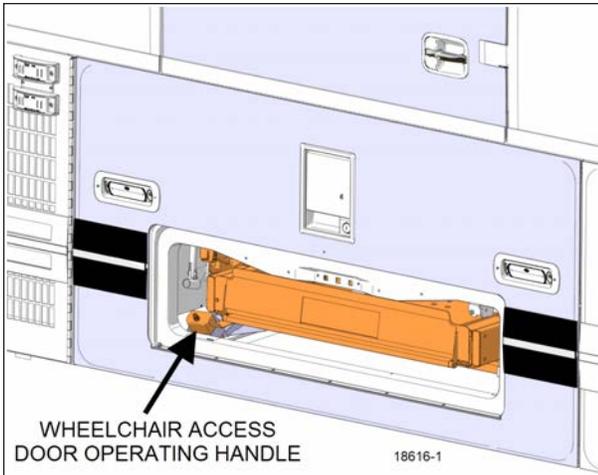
WHEELCHAIR ACCESS DOOR OPERATING HANDLE
